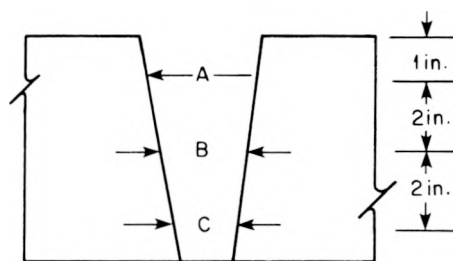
V-8 prolongation — V-8 cavity repair welding sequence.
